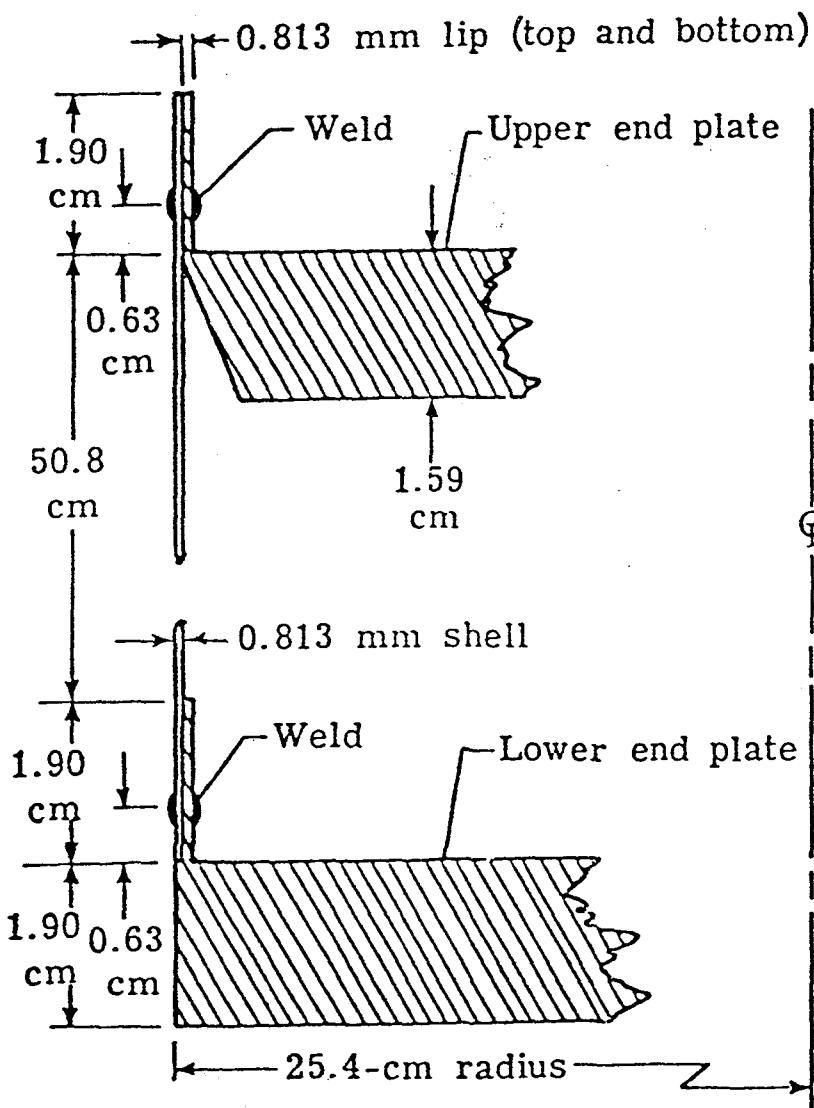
Construction details of the 6061 aluminum cylindrical tank.
